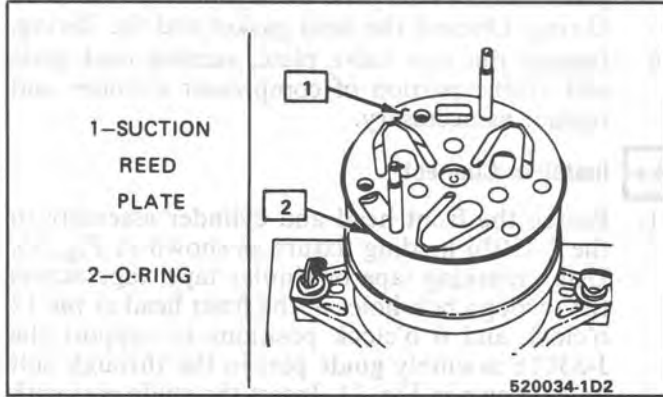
Suction Reed Plate Assembled To Cylinder Assembly
